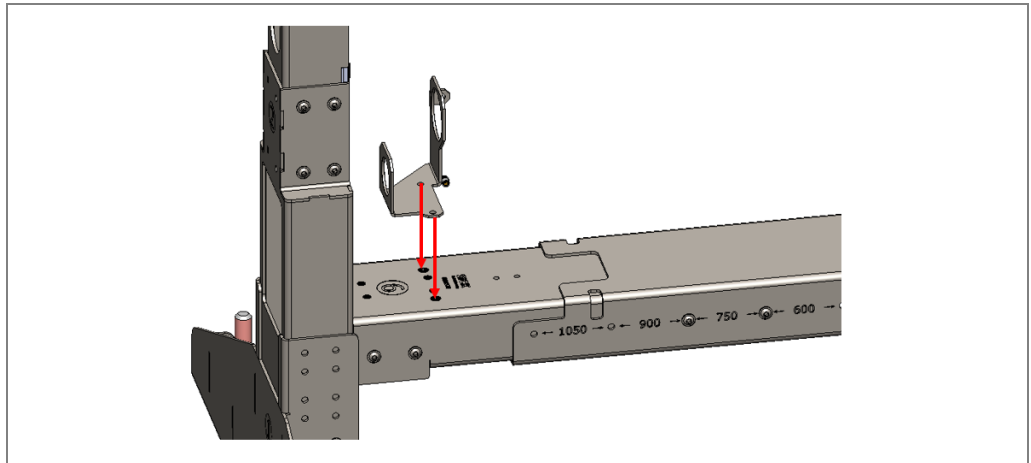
Steel frame: attaching the bracket for mounting the protective pipe and vent duct
